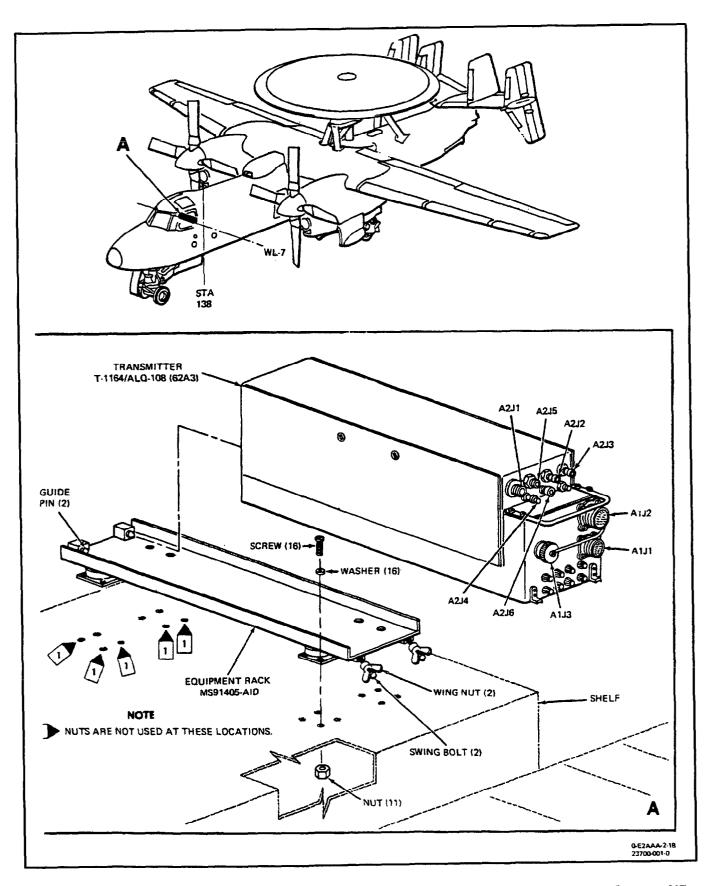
Removal and Installation of Transmitter T-1164/ALQ-108 and Equipment Rack MS91405-AID
